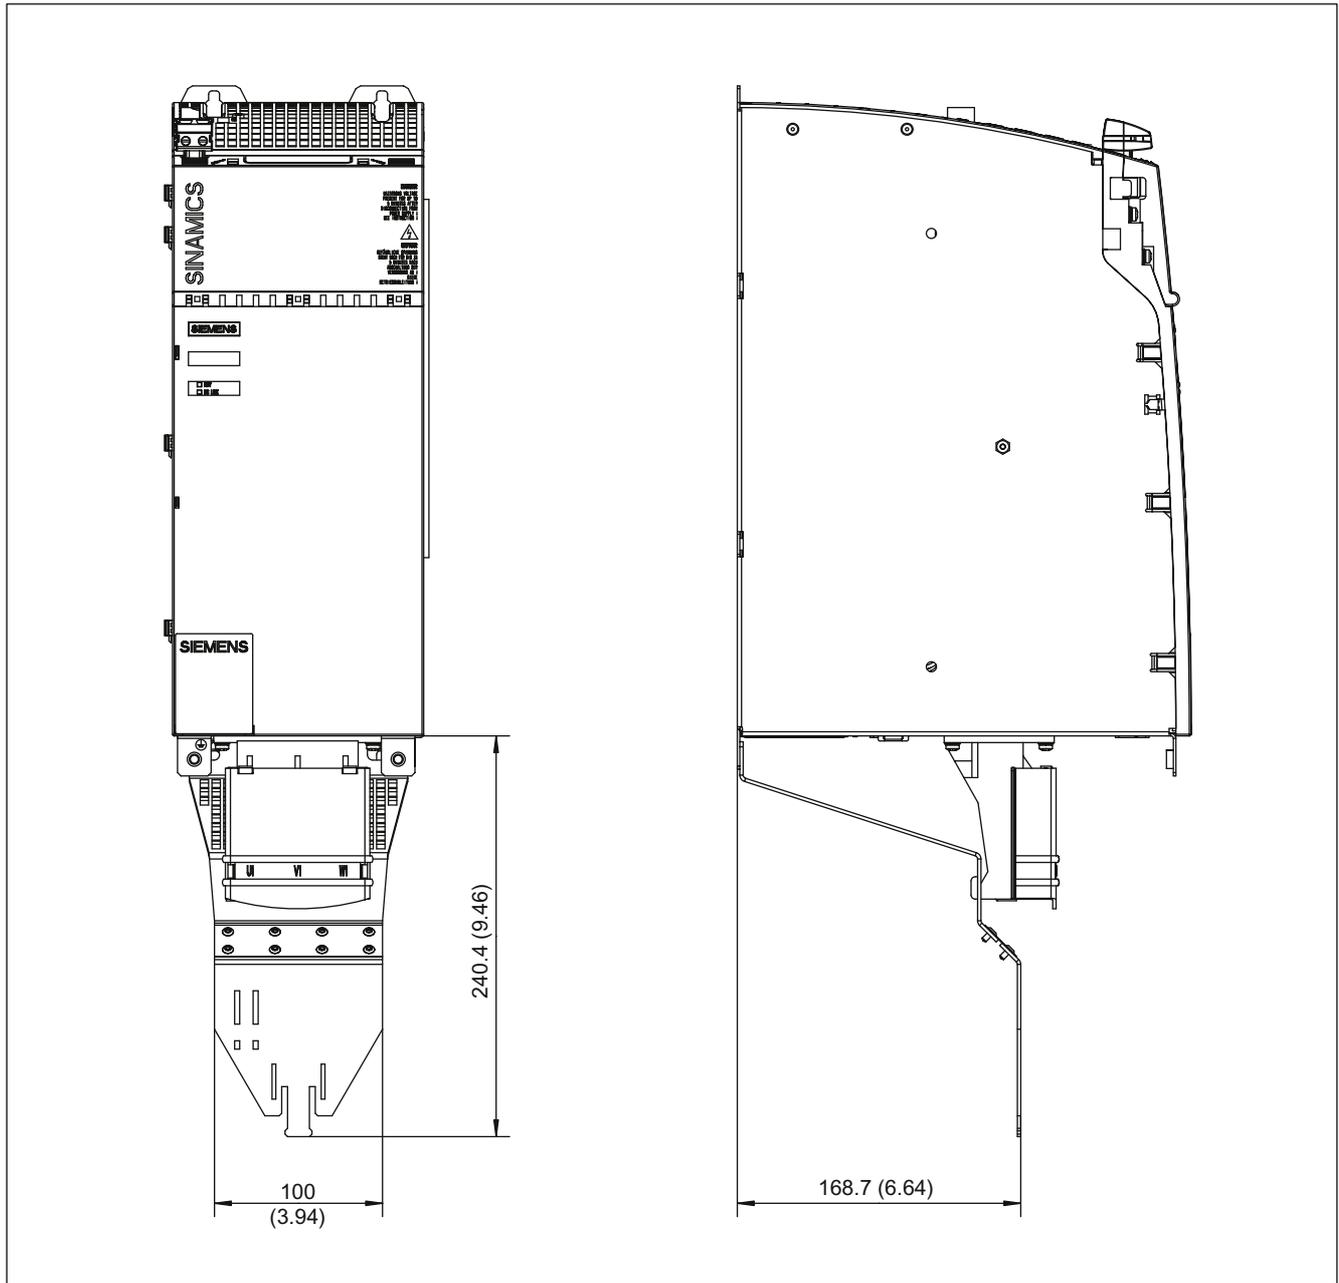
Dimension drawing of shield connecting plate on a 150 mm component with internal air cooling, all dimensions in mm and (inches)
